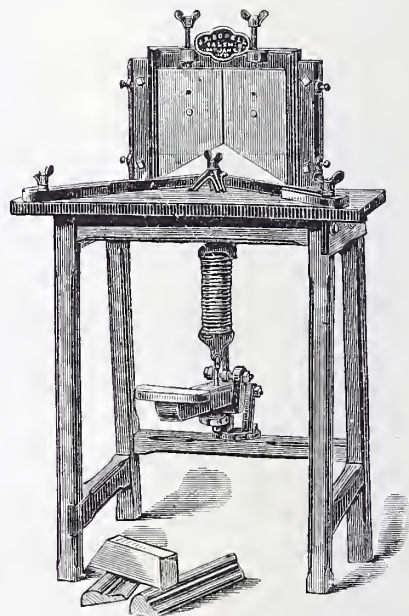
Bodell's Foot-Power Mitering Machine.
